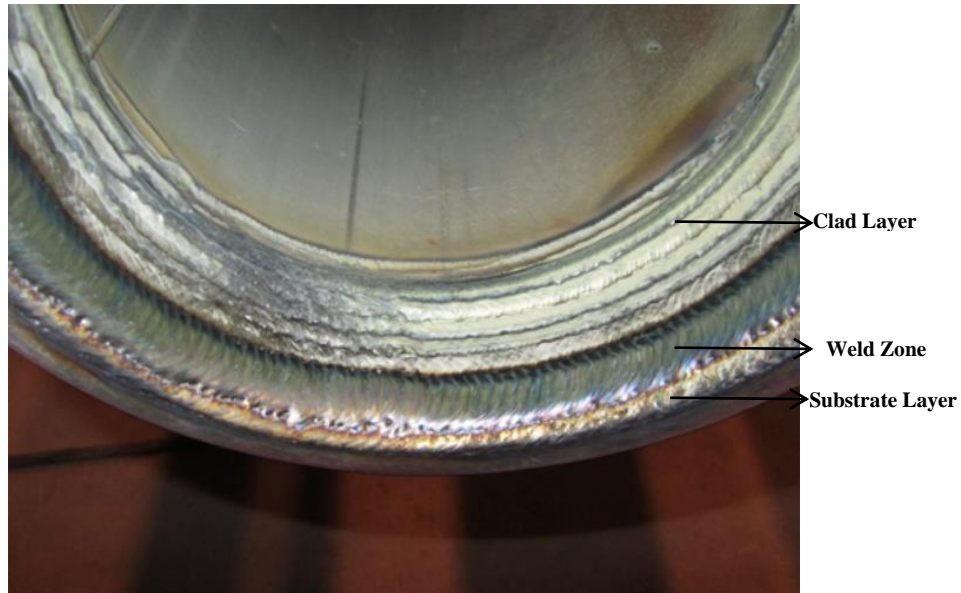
Cladded Pipe Weld (TIP TIG, 2019)
